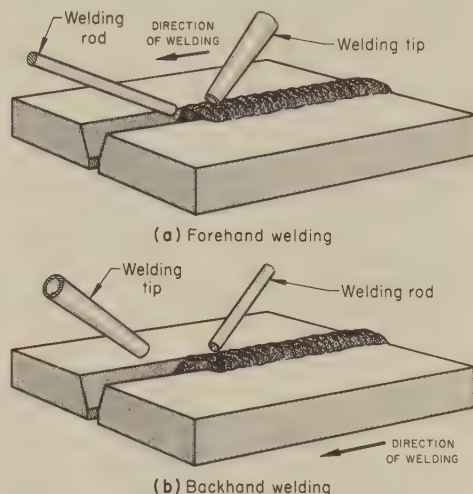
Two basic techniques for manipulation of the welding tip and the welding rod in gas welding. See text at right for discussion of relative merits of the two.
